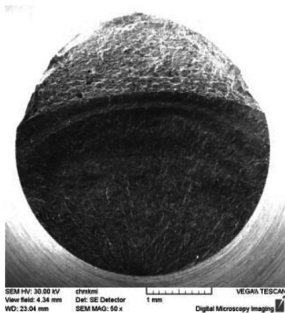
Fatigue fracture of specimens on a macro scale: surface fatigue crack initiation for steel Hardox 450
